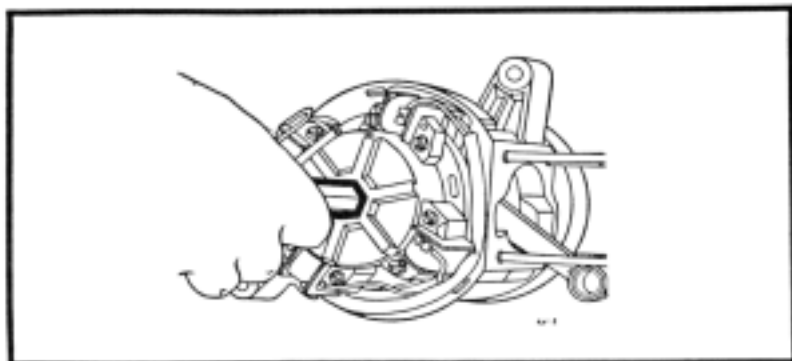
Using a socket wrench for purchase, move the rotor up and down to detect main bearing wear.
